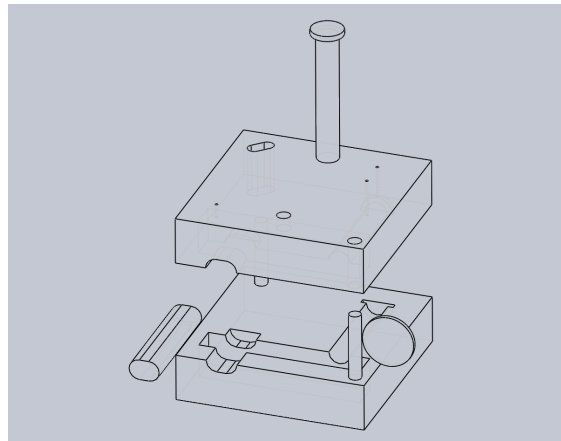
Solidworks Drawing of Sliding Post Test Mold
